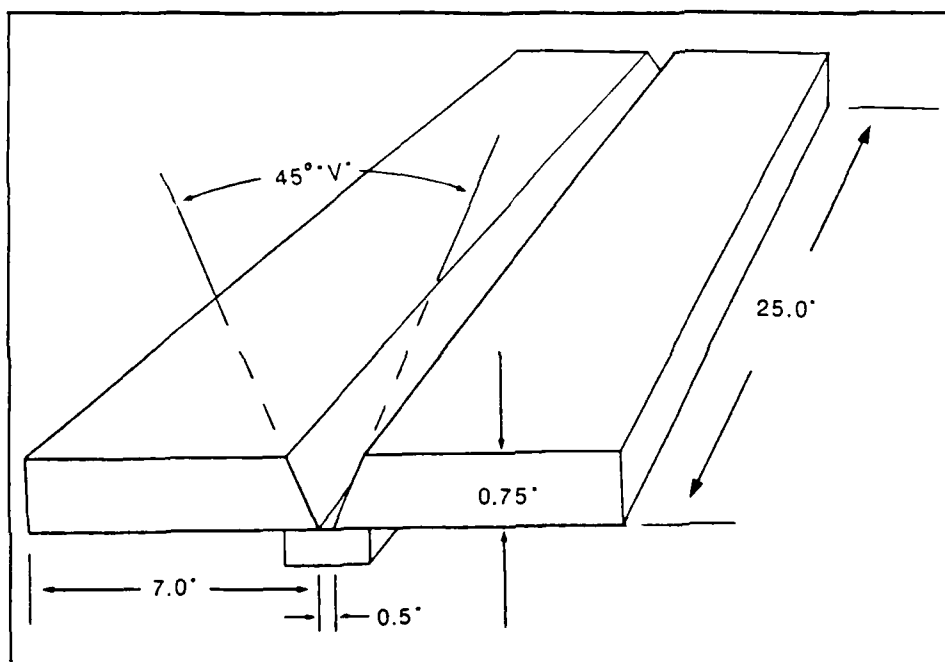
The test plate joint geometry in accordance with MIL-E-23765/2D.
